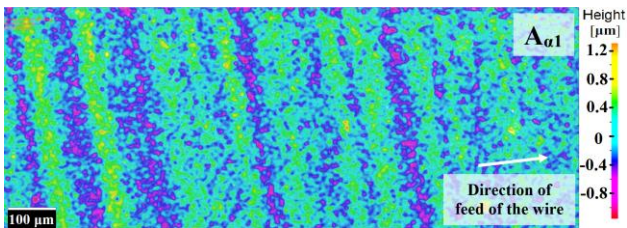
The Surface of The First Major Flank Sharpened by WEDM Technology
